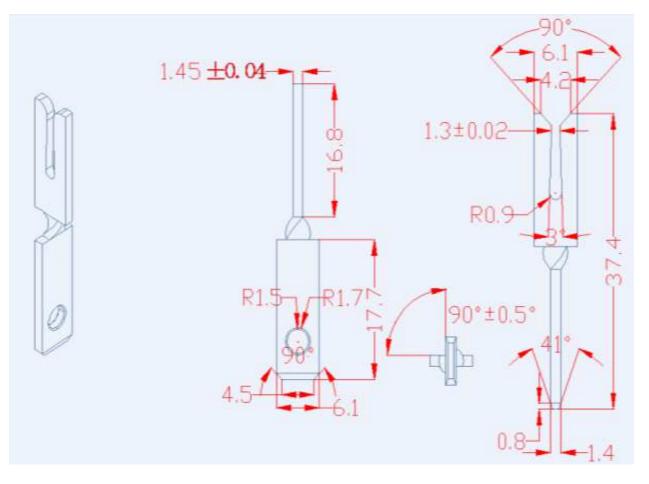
Engineering dimension drawing for blade, pin and contact for type 40106 (unit:mm)
